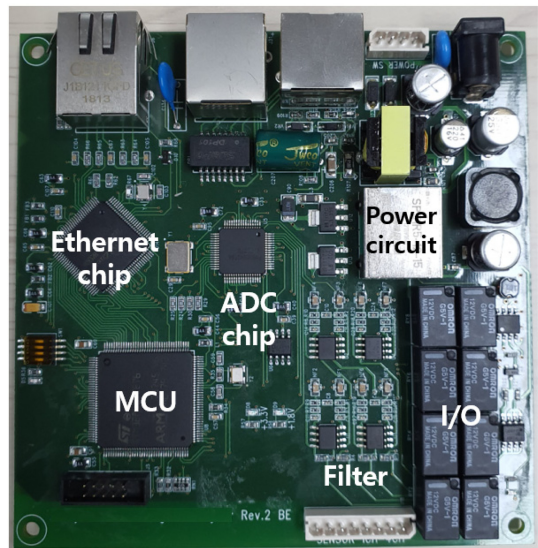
Photograph of the DAQ PCB board. The board in compact design had the size of 110 mm × 110 mm.
